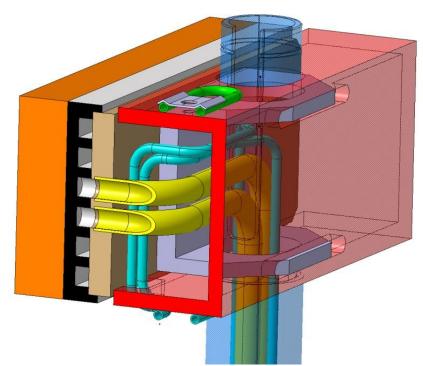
Cutaway of the jaw assembly. Two independent cooling circuits for jaw-bas and c-shaped beam.
